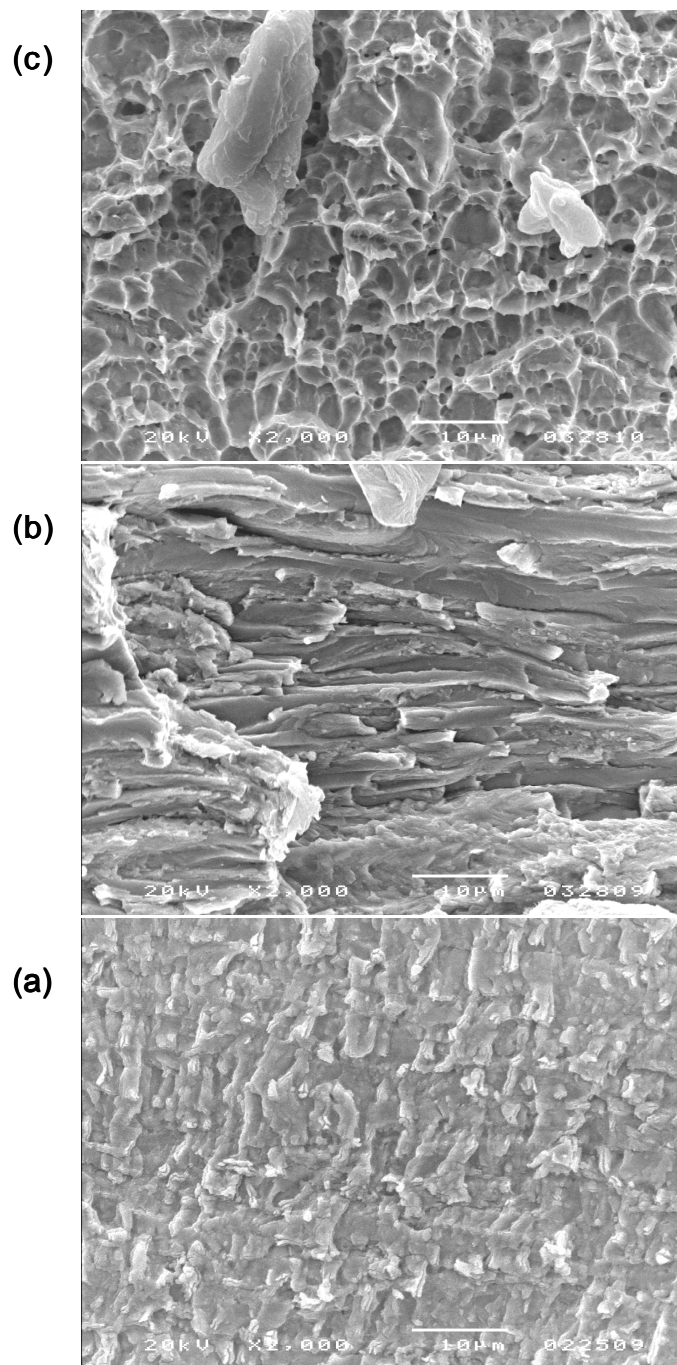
Fracture surface in the defect area of a specimen tested for; 1 – fatigue crack; 2 – ISCC; 3 – ductile overload
